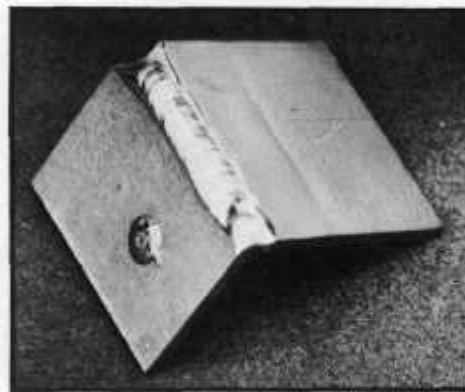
Locations of Fractures in Molybdenum Convection Loop and Joint Design Used in the Repair of the Fracture in Hot Leg.
